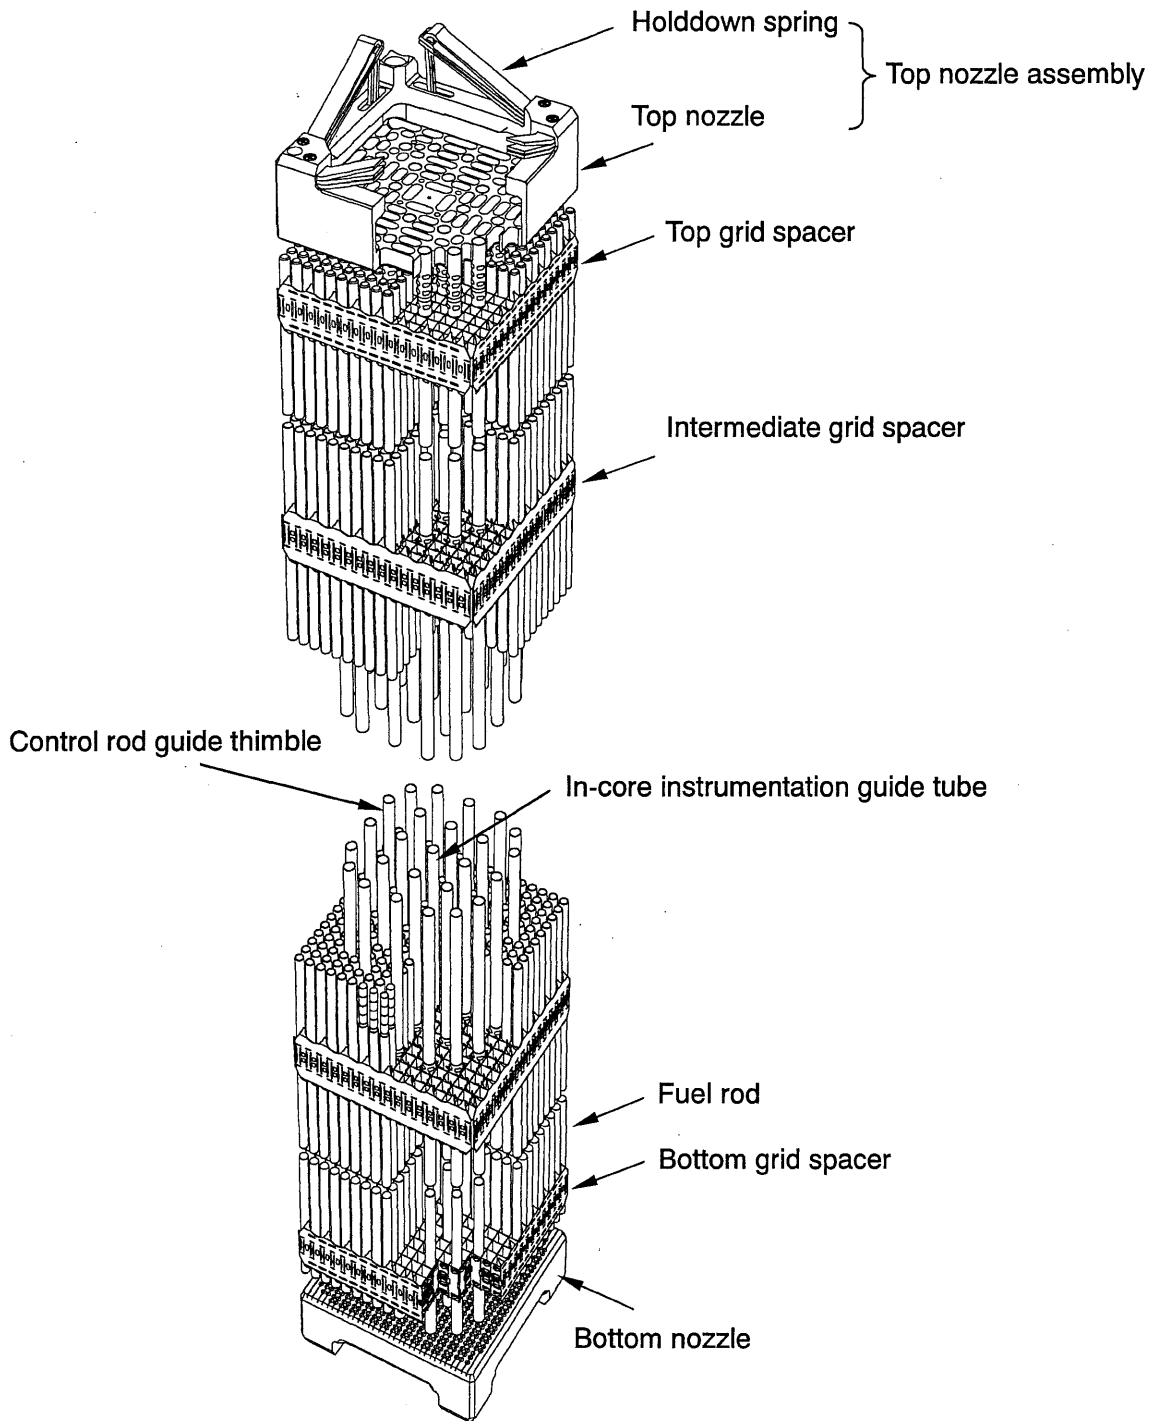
Schematic Mitsubishi Fuel Assembly
